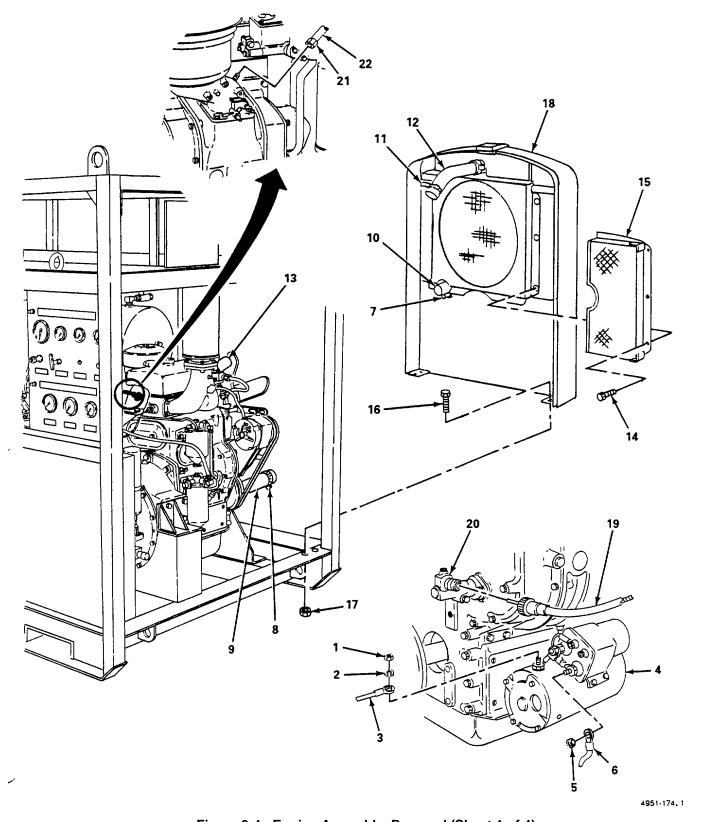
Engine Assembly, Removal (Sheet 1 of 4).
